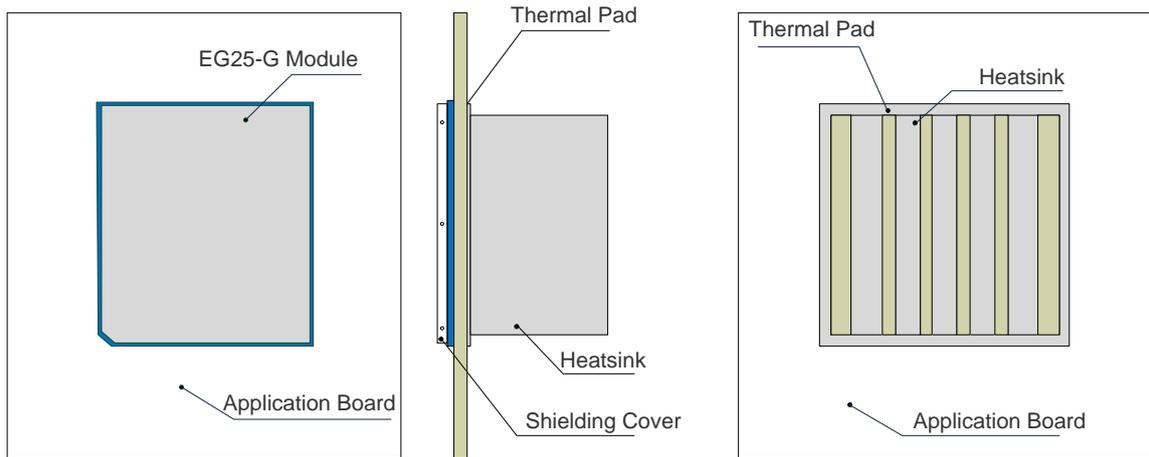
Referenced Heatsink Design (Heatsink at the Backside of Your PCB)
